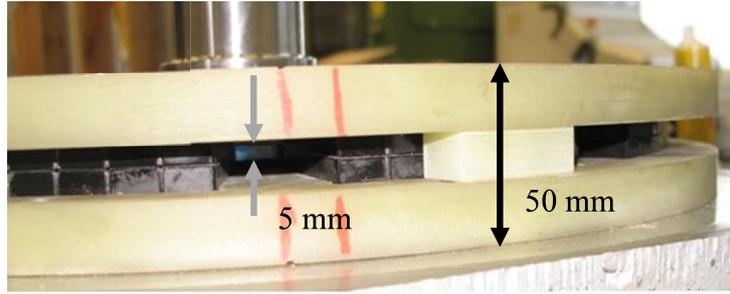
Rotor structure’s glass fibre bodywork and permanent magnets after assembly.
